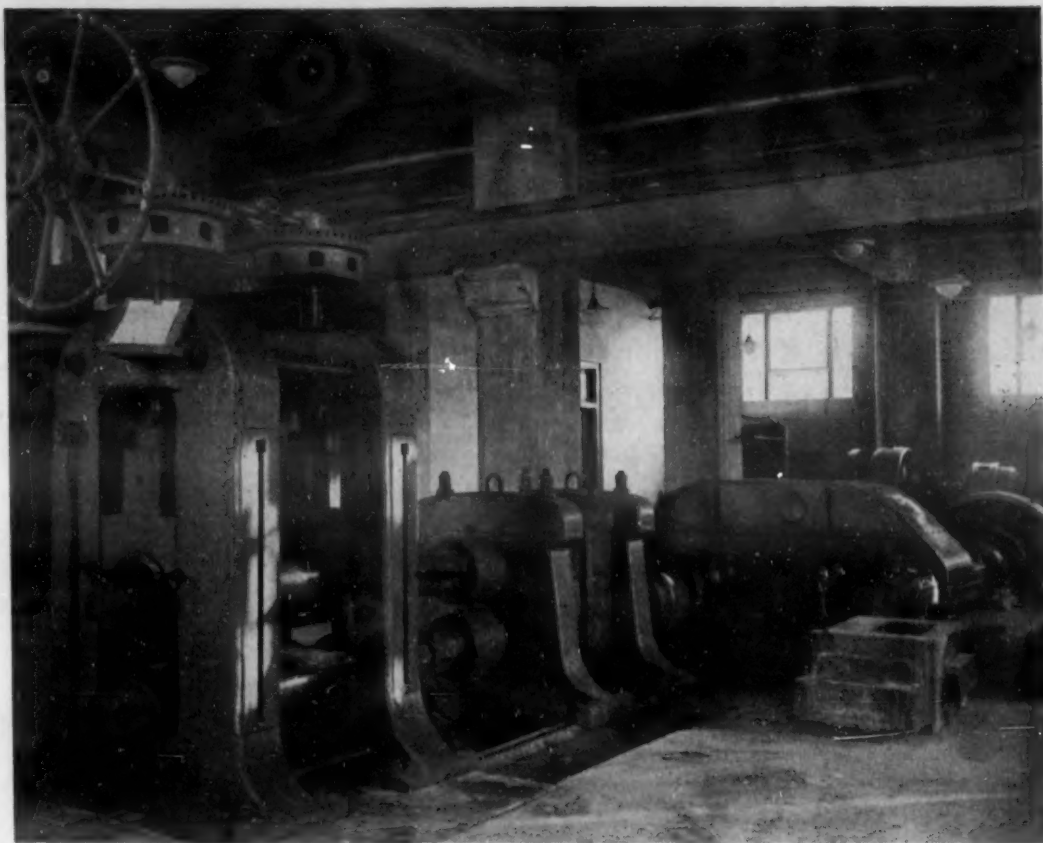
16-inch Rolling Mill for Sheets and Rods
